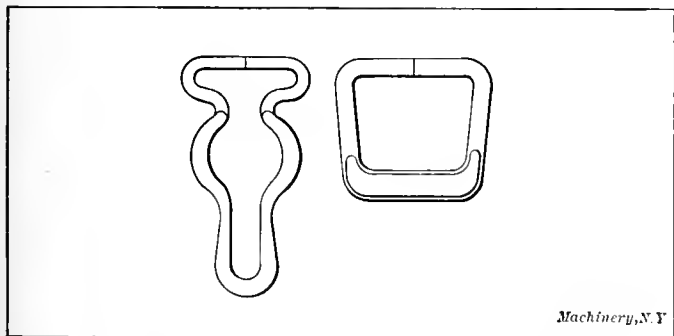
Examples of Work Done on Machine shown in Fig. 1
